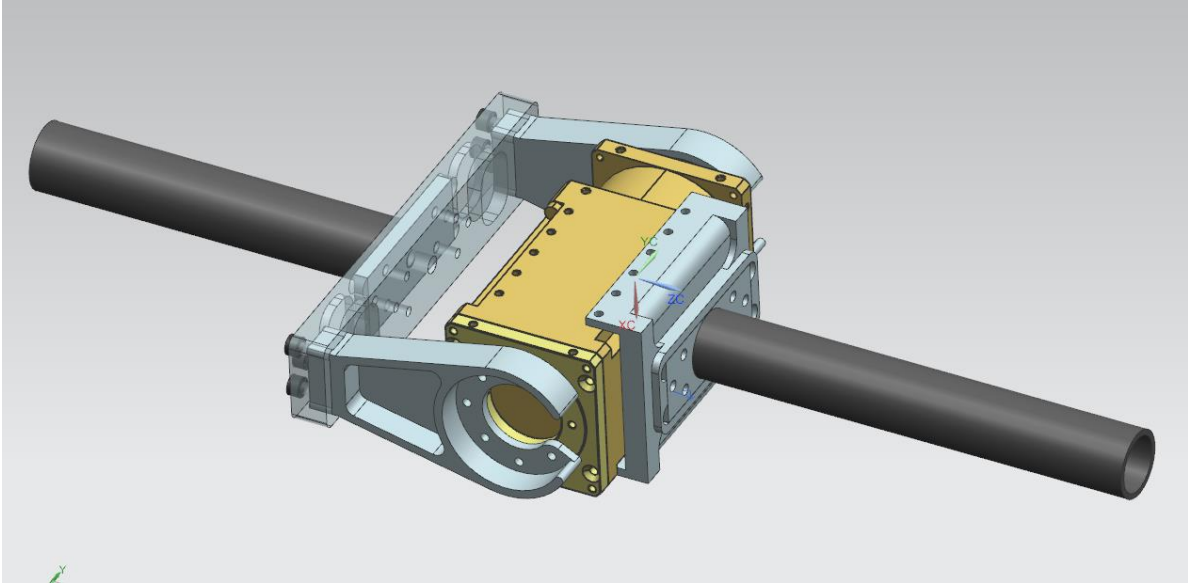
CAD Model of Modular Knee Assembly (Front View)
